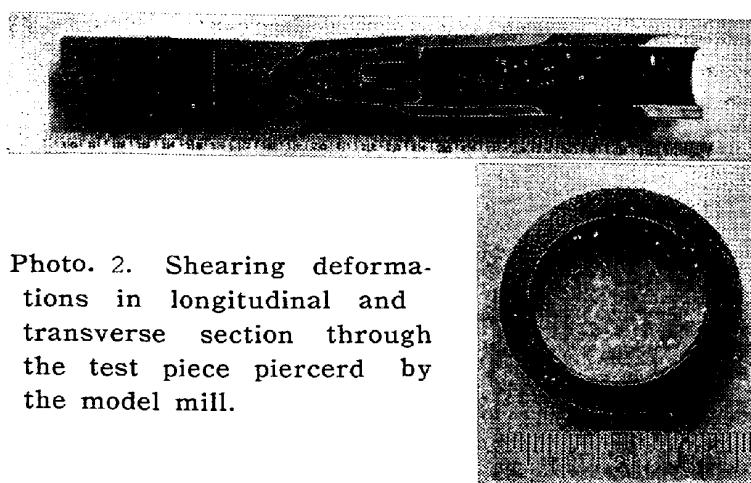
Shearing deformations in longitudinal and transverse section through the test piece pierced by the model mill.
